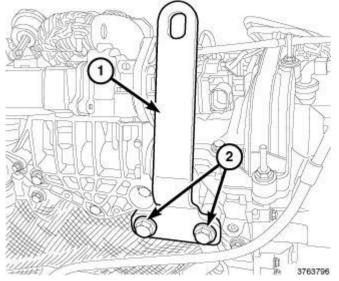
Engine Lifting Bracket & Bolts - Right Courtesy of CHRYSLER GROUP, LLC
